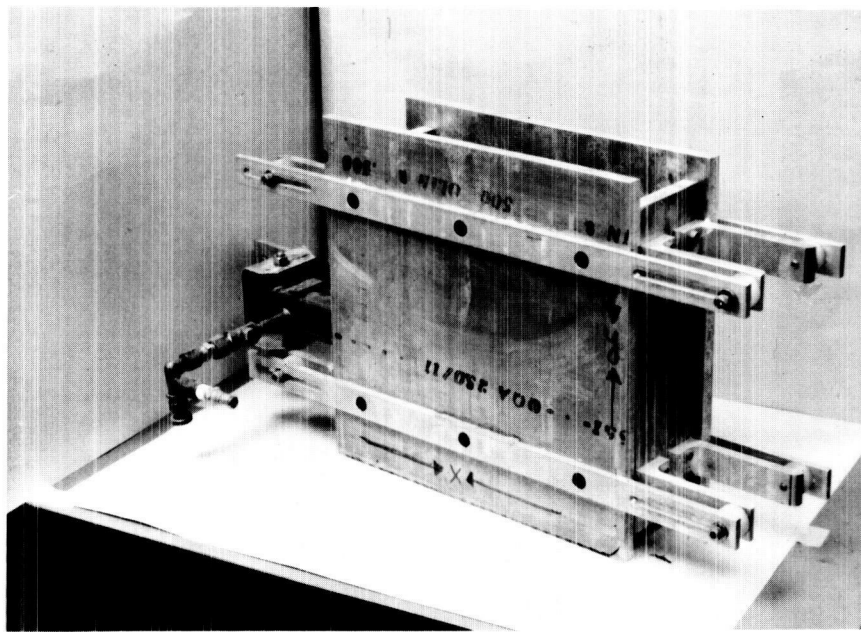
Photograph of directional molding apparatus. Principal panel directions are identified on photograph as: "X", "Y" and "Z"
